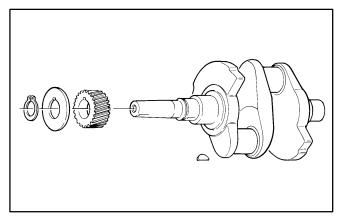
CRANKSHAFT AND TIMING GEAR
